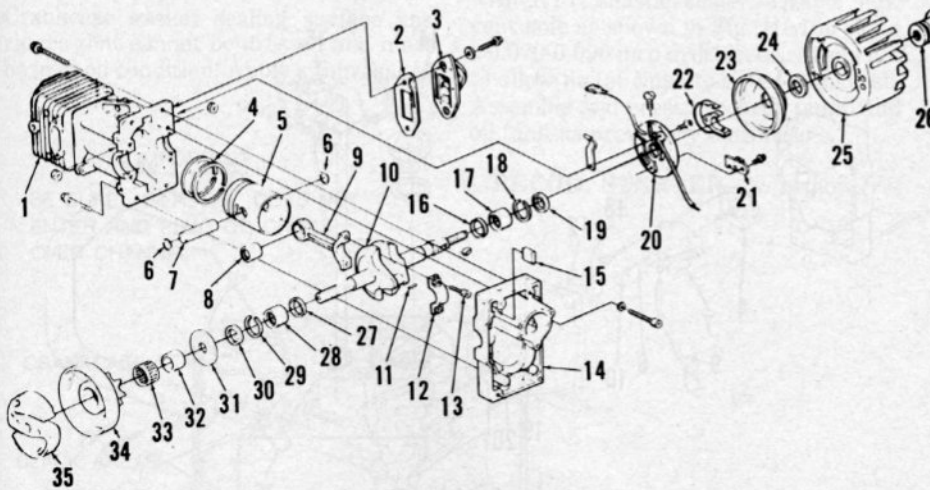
Exploded view of 150 Automatic engine, clutch and flywheel assemblies.
